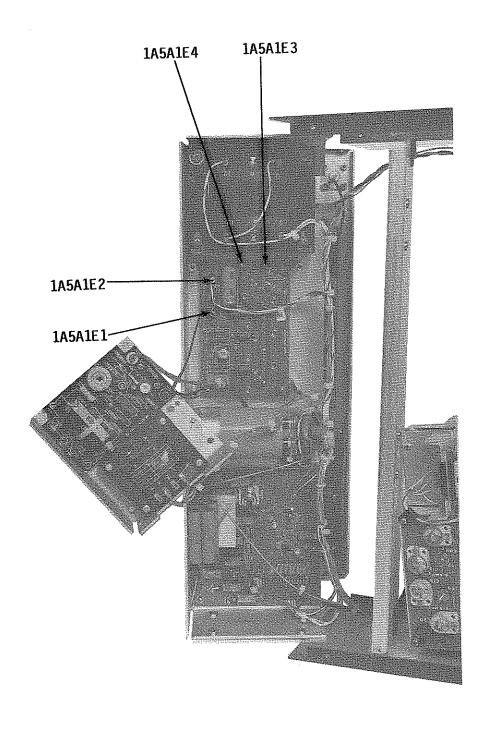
SHEET 8 of 19, 26V POWER SUPPLY DISASSEMBLY
